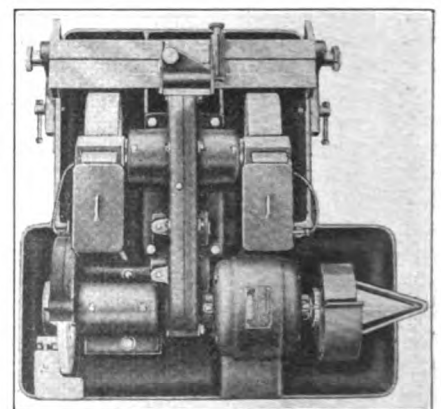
PLAN VIEW SHOWING THE ARRANGEMENT OF THE FOUR WHEELS
